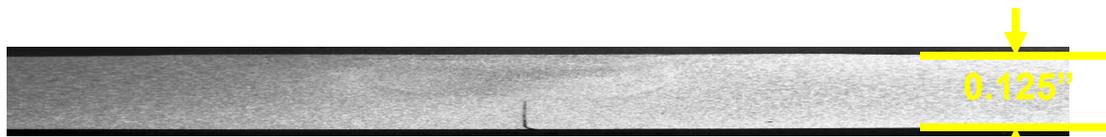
Macro (1-pass) showing partial depth welding of Weld # 20
